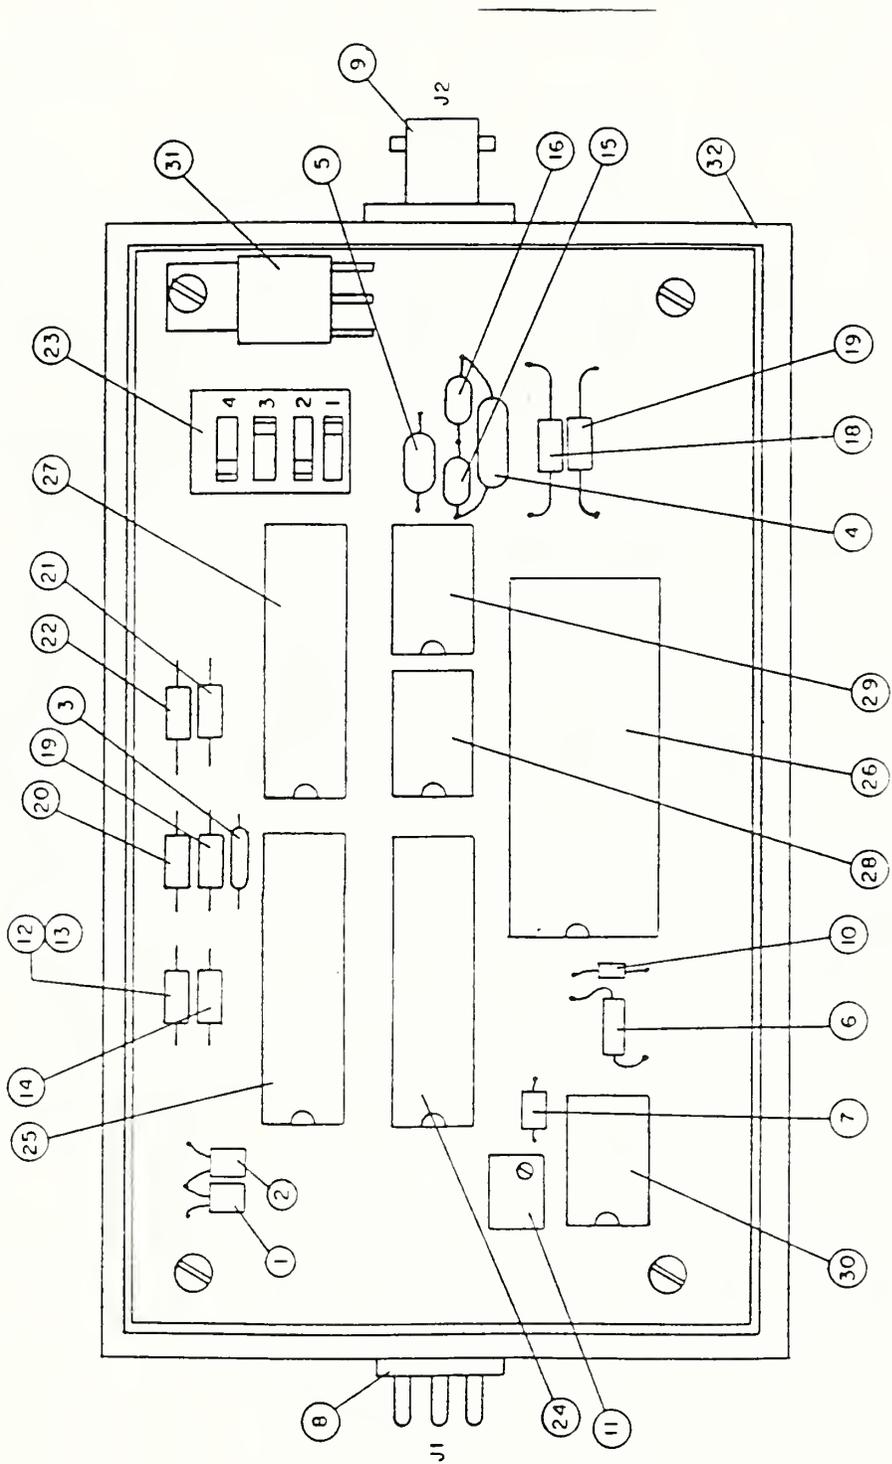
Crest Factor Generator, 3:1, Assembly Drawing
